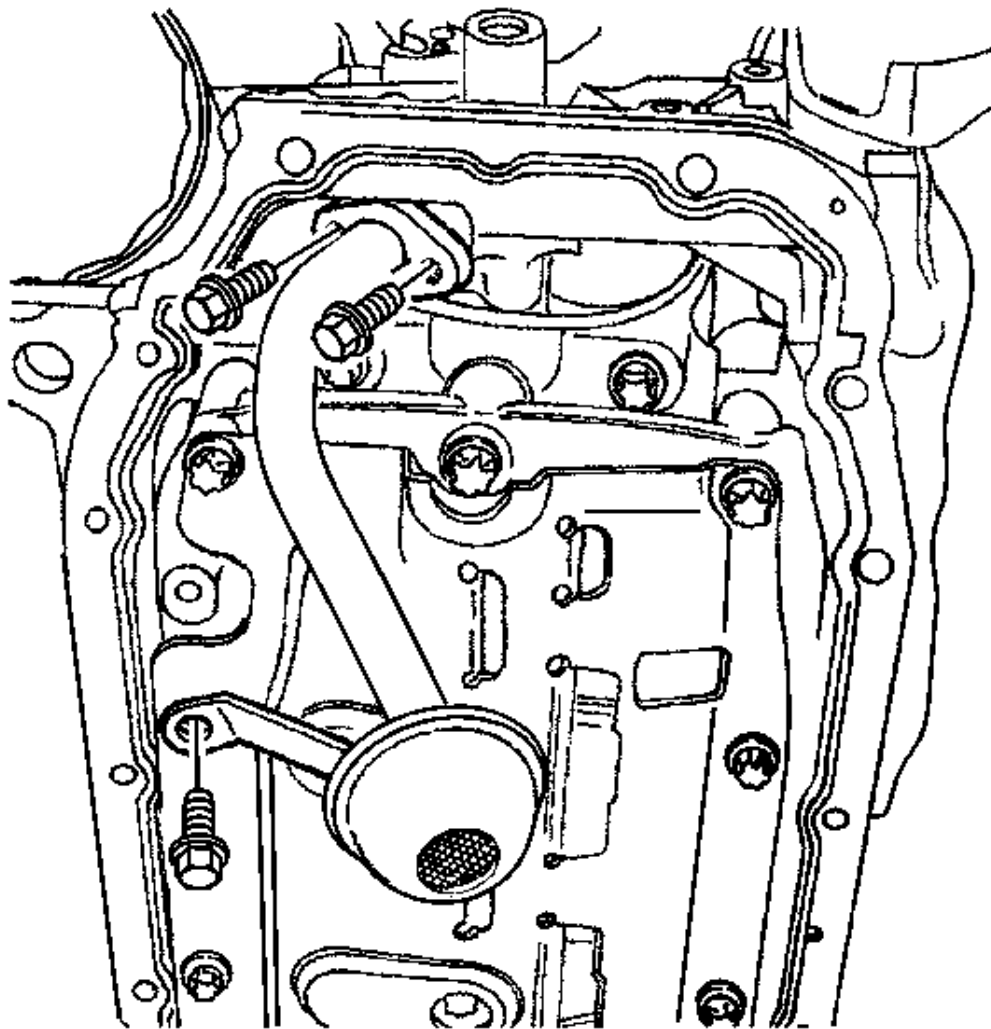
View Of Oil Pump Pickup Tube And Bolts
